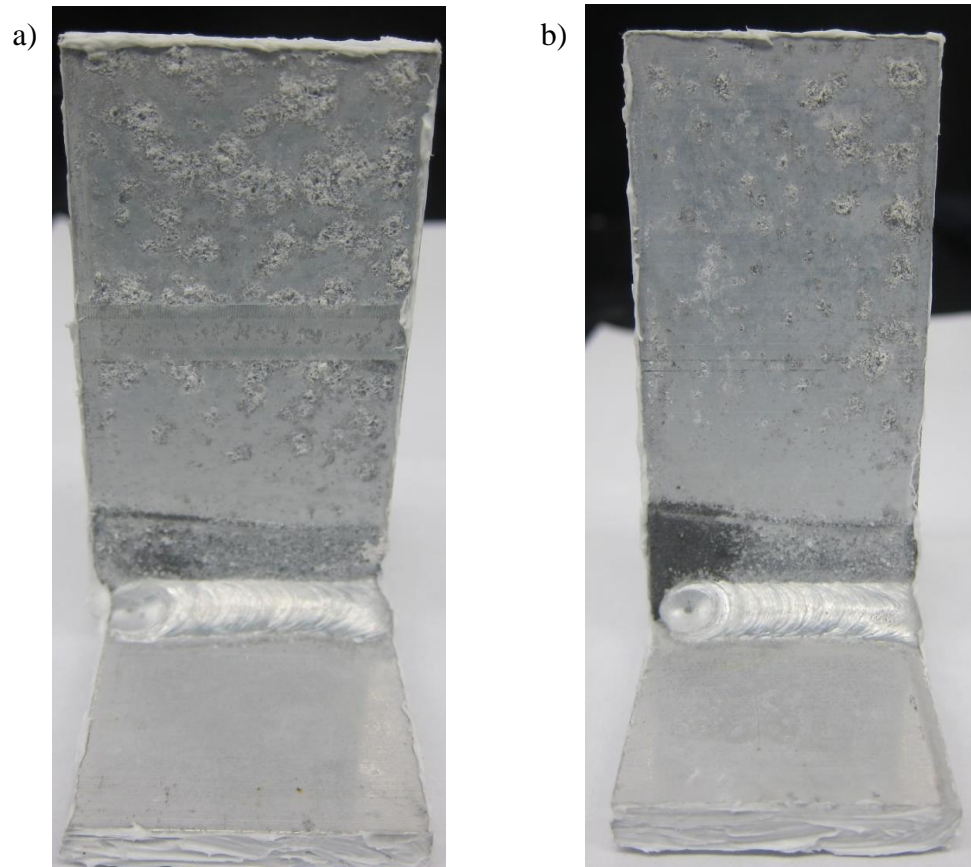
Duplicate samples of T-joint welded configuration H1(ER5356/AA7003/⇒) in the as-welded T6 condition.
